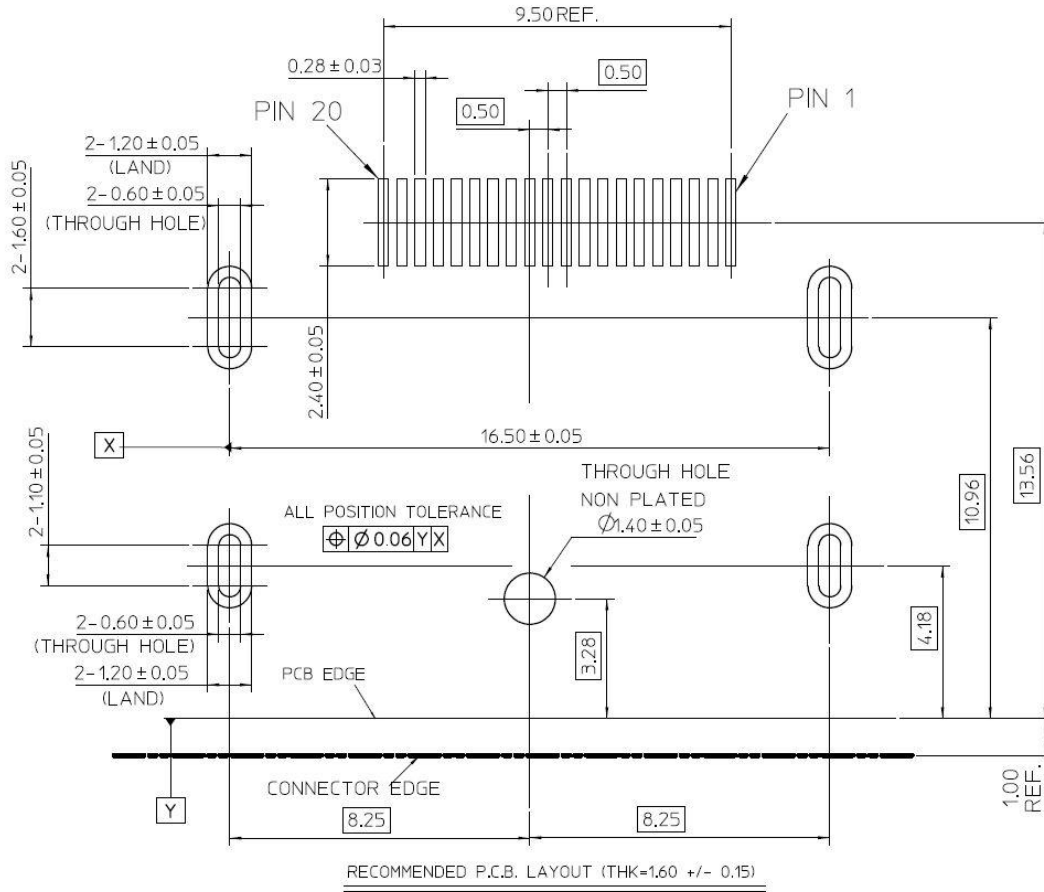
Recommended PCB Layout for DP External Cable-Connector Assembly
